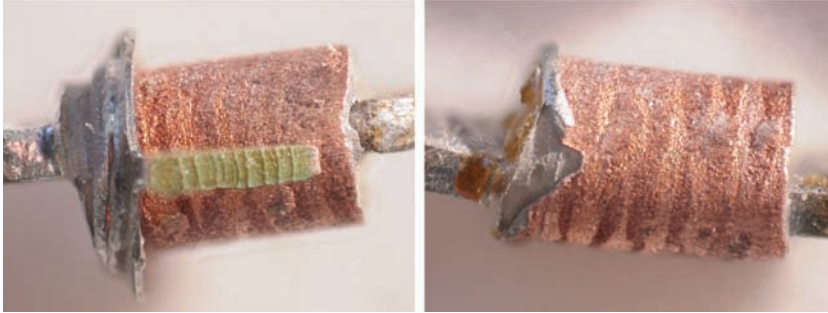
Typical examples of through-hole pins after pull testing from an intrusive reflow production board. Comparing solder joint pull strength between samples produced by wave (left) and selective (right) soldering show little practical difference. The example shows the copper barrel/solder joint removed from the board. Depending on the pin or connector design, it is more common for the pin to break or pull out of the housing during testing than the solder joint fail.
